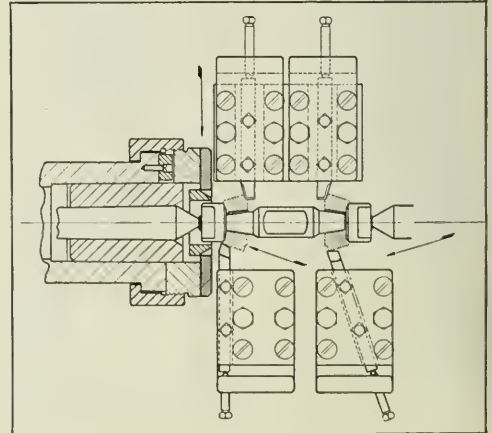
Turning Small Bevel Pinion on a Special Double-carriage Fay Automatic Lathe
